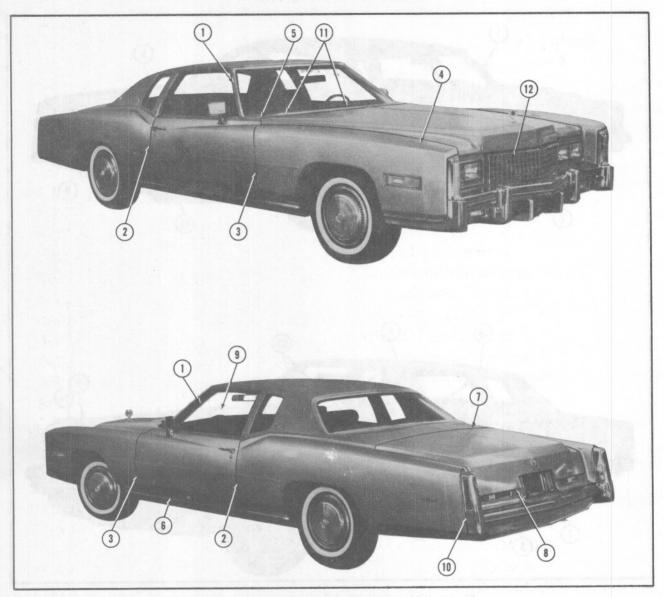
Sheet Metal Tolerances—Eldorado
